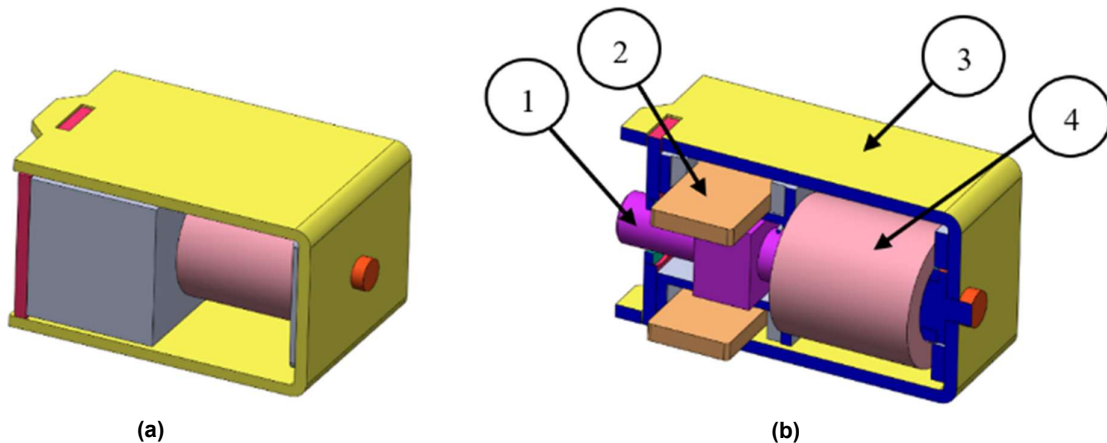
(a) Magnetic actuator assembly; (b) Cross-sectional view of the actuator design and its main components: (1) shaft, (2) magnet, (3) chassis, and (4) coil.
